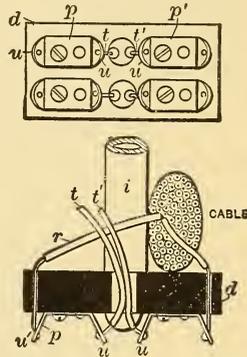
DETAIL OF CONNECTING STRIPS.
